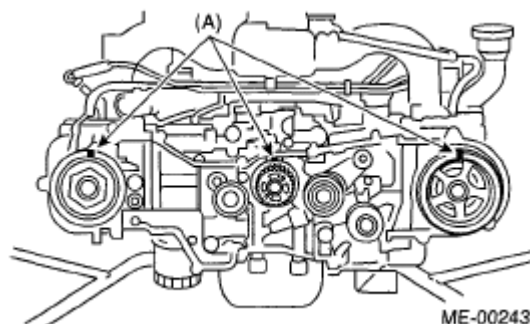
Identifying Alignment Marks Of Cam Sprockets No. 1 And No. 2
